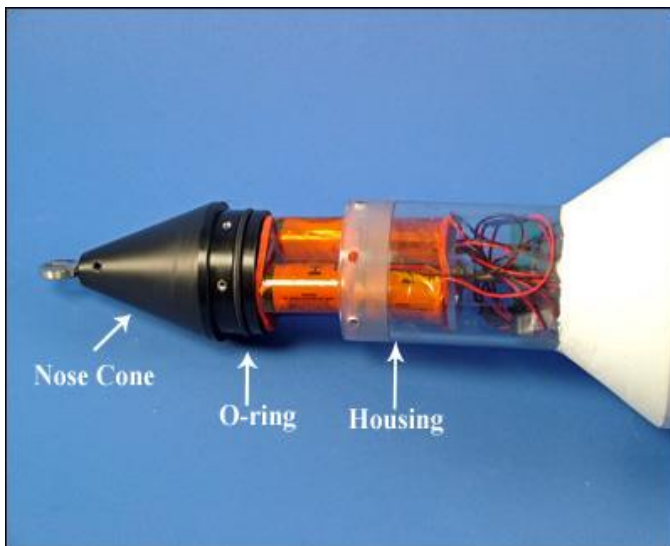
Nose cone and battery assemblies ready to be installed in the housing.
